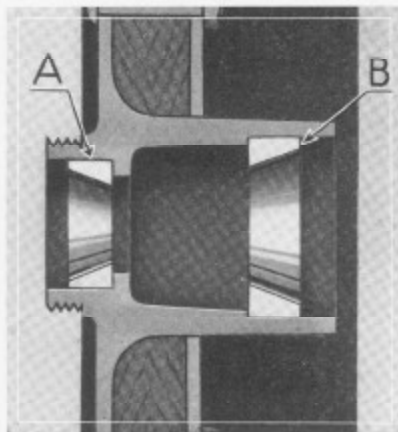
Cross Section of Wheel Hub showing Timken Bearing Cups in Place
